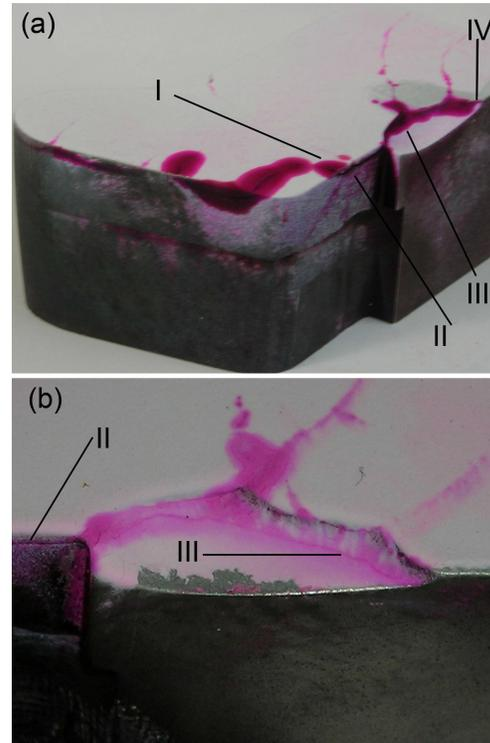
Fragments of the die from the interior of the complex cutting area, after inspection using penetrating liquids
